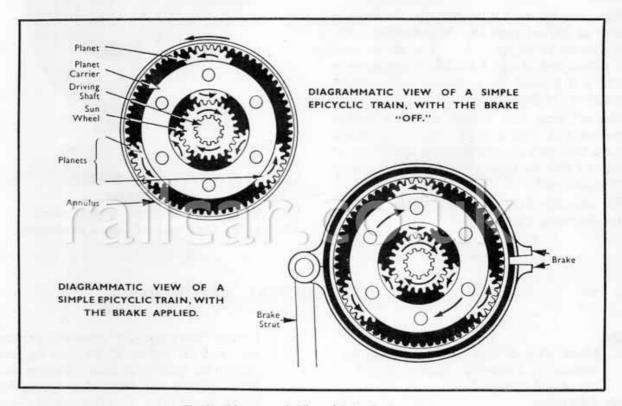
Diagrammatic View of Epicyclic Gear Train.
